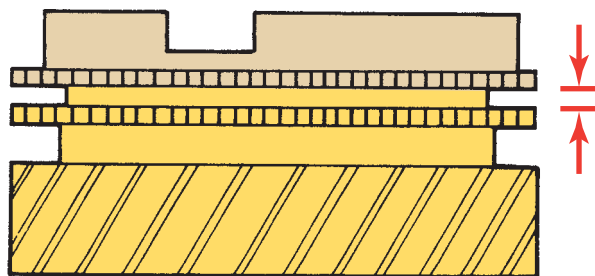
The clearance between the synchronizer blocker ring and the gear's clutching teeth must meet specifications.
